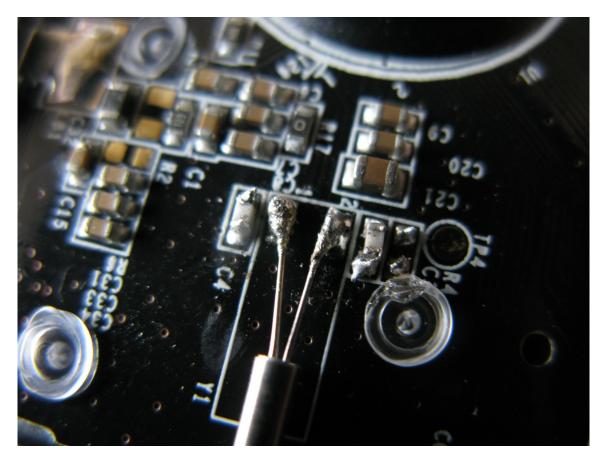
Shorten contacts of clock crystal so that it fits in the Y1 rectangle. Put solder on crystal's legs and on PCB contacts. Solder it in, while holding it with tweezers.
